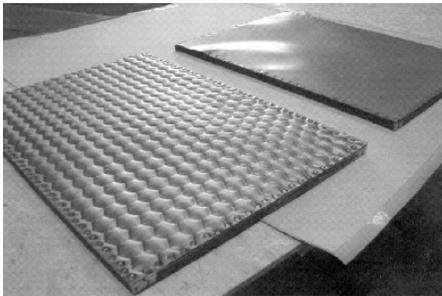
Vault-structured sheet metal of stainless steel spot welded on a frame
